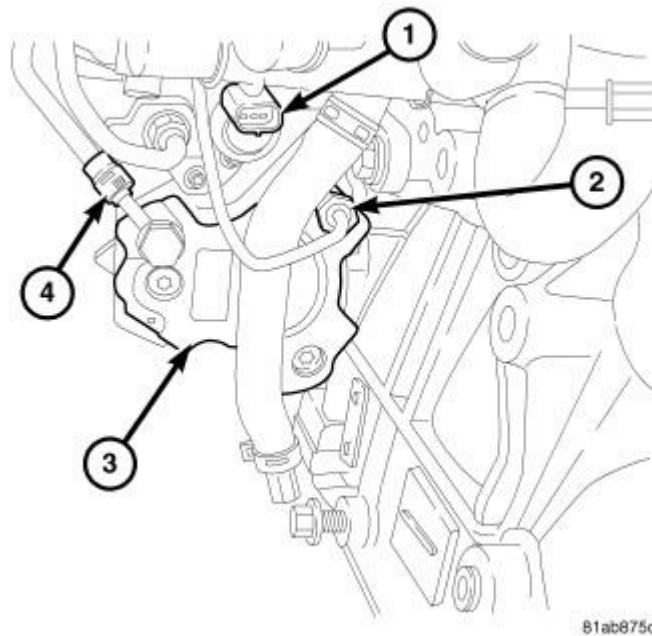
HIGH PRESSURE FUEL LINE AT PUMP
